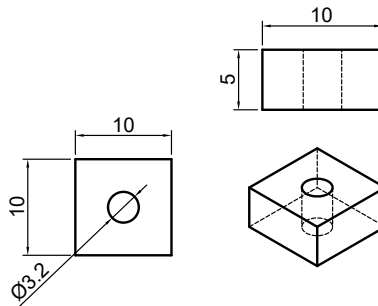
Technical drawing and dimensions of clamping PMMA cap
